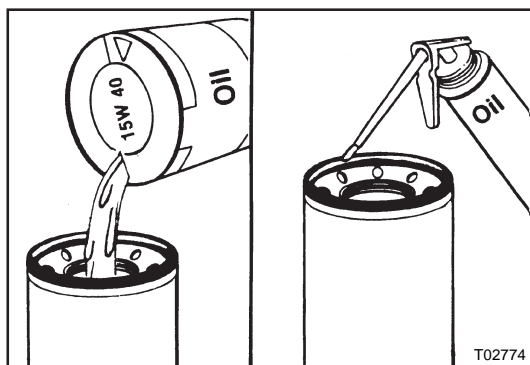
Fill filter with clean lubricating oil and apply light film of lubricating oil to gasket sealing surface
